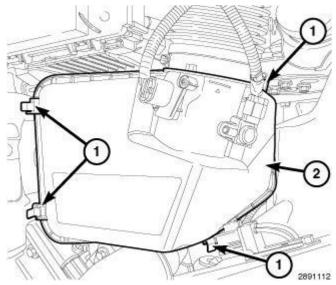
Lock Tabs & Housing Cover Courtesy of CHRYSLER LLC
